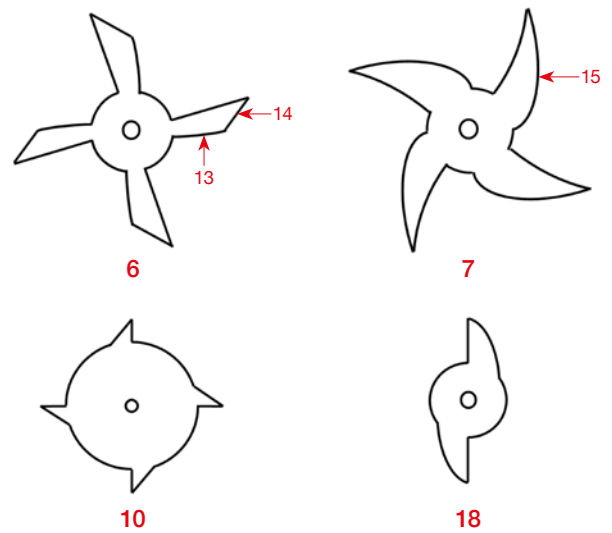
Schematic views of the cams and latching wheel carried by the cam arbor.
